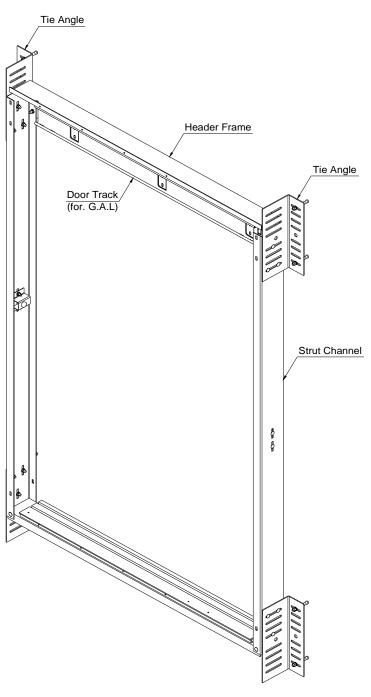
STRUT AND HEADER FRAME ASSEMBLY (TWO SPEED)
